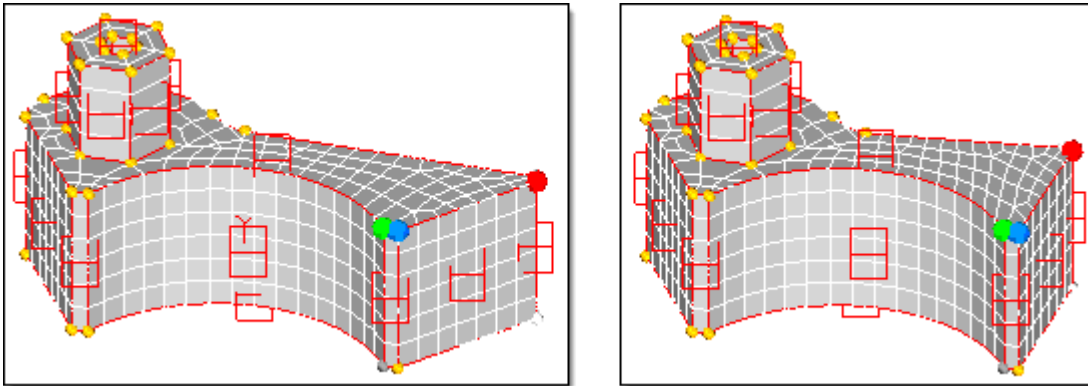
Morph by Altering Dimensions using Angle between Two Faces of Block - Angle
